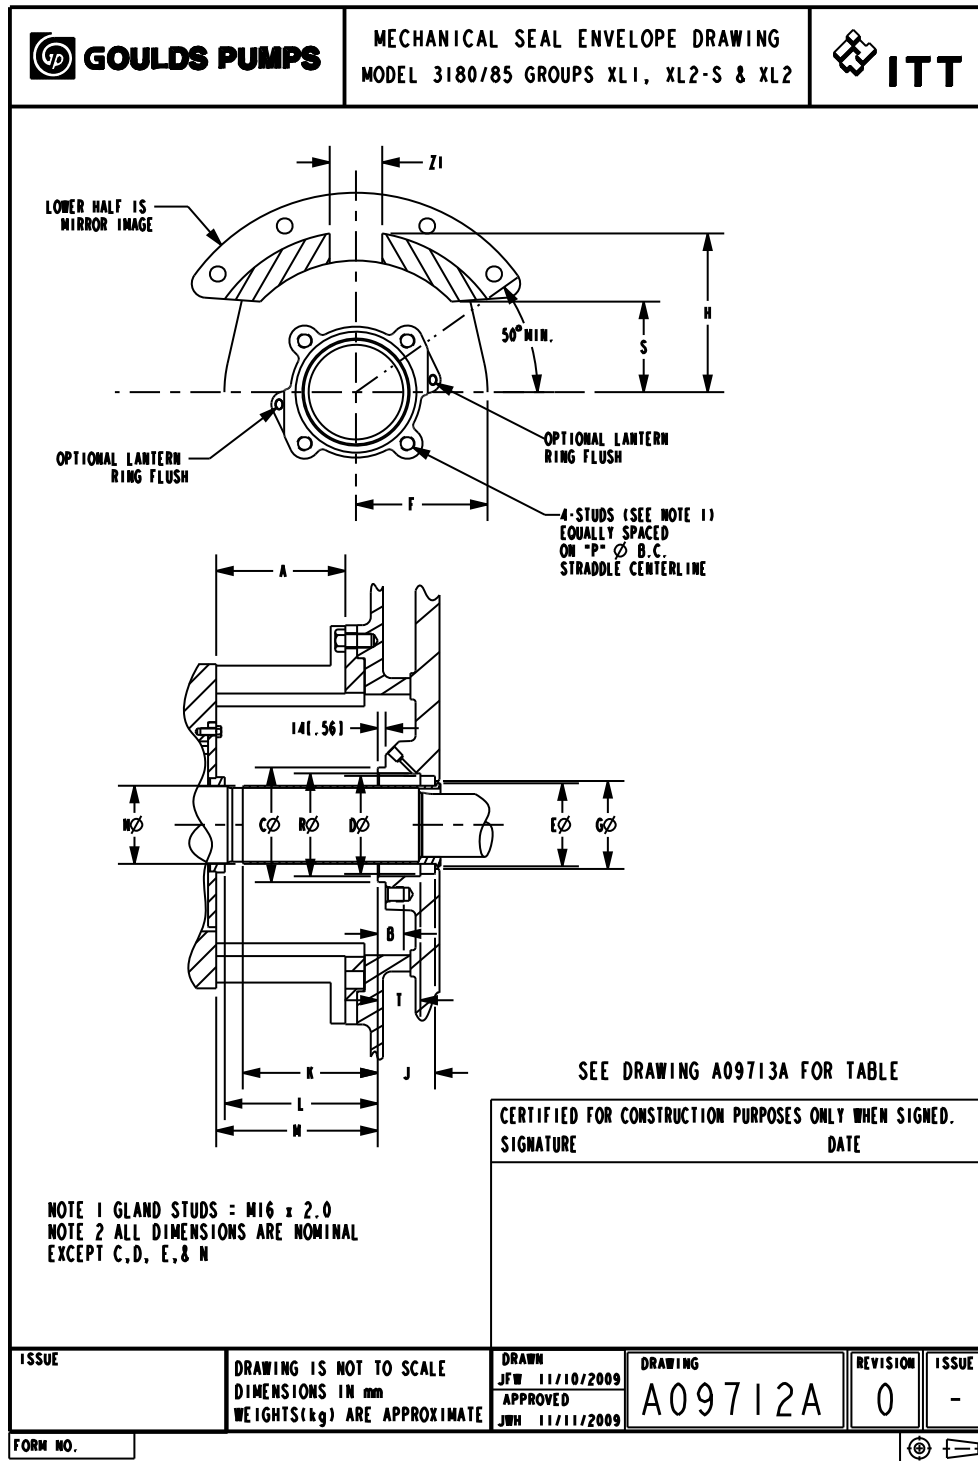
3180/3185 XL1, XL2-S, and XL2 mechanical seal, drawing A09712AA, revision 0, issue
